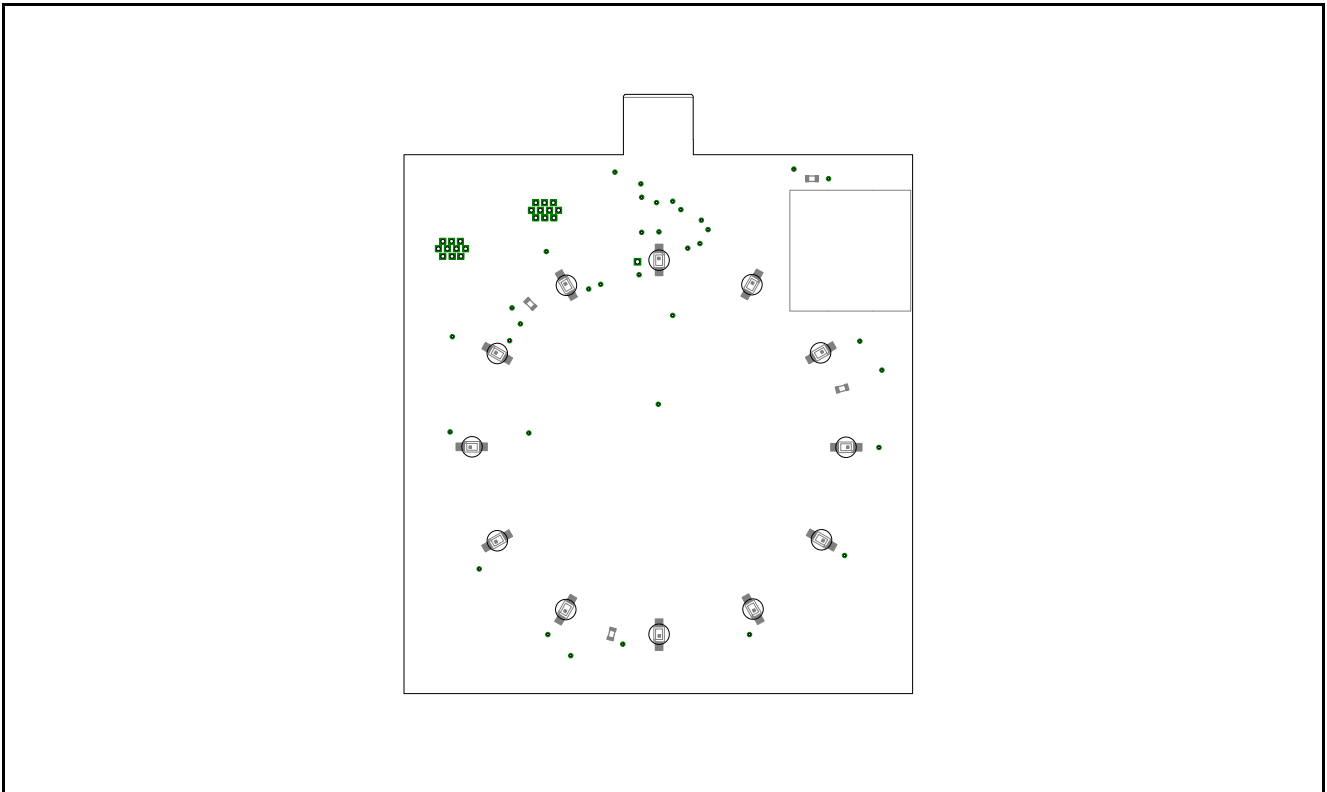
inTouch Wheel* Board Component Bottom Layout
